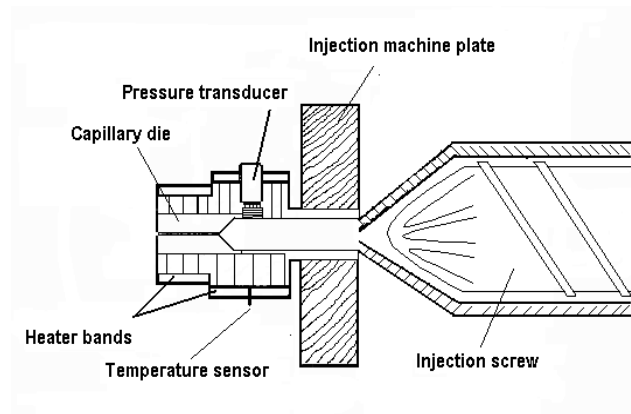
Schematic representation of the capillary rheometer mounted on an injection-molding machine.
